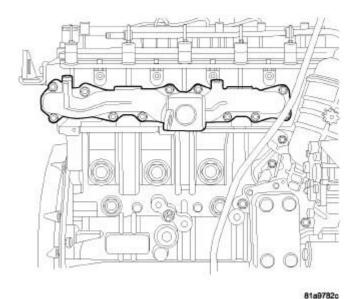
Exhaust Manifold Courtesy of CHRYSLER LLC
